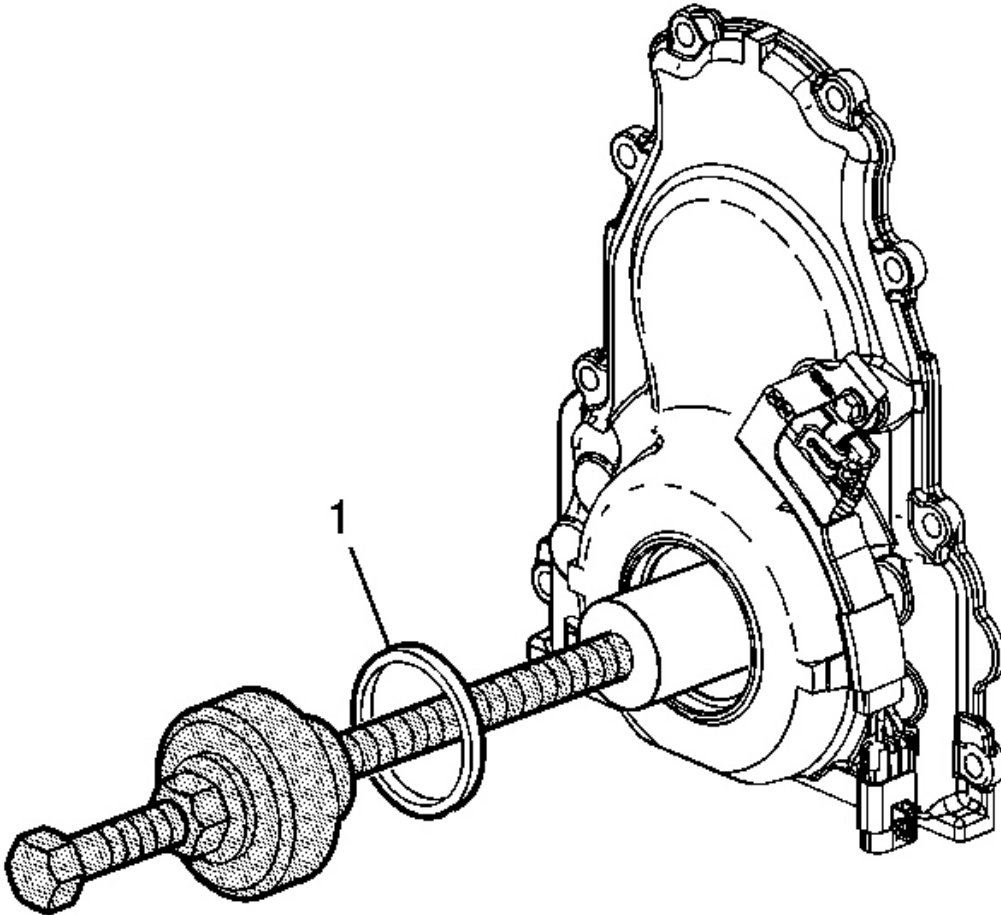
View Of Crankshaft Front Oil Seal Installation
